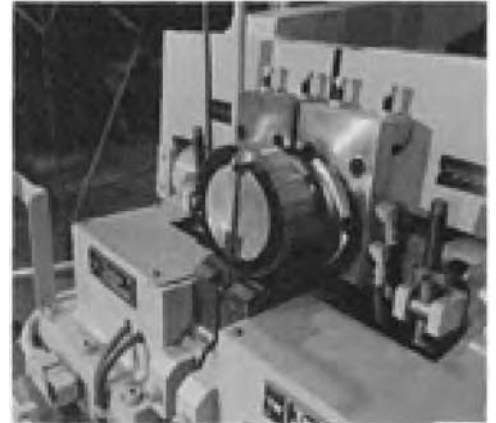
Flash-welding machine used to fabricate a coiled steel strip into a small-diameter ring with a flange
